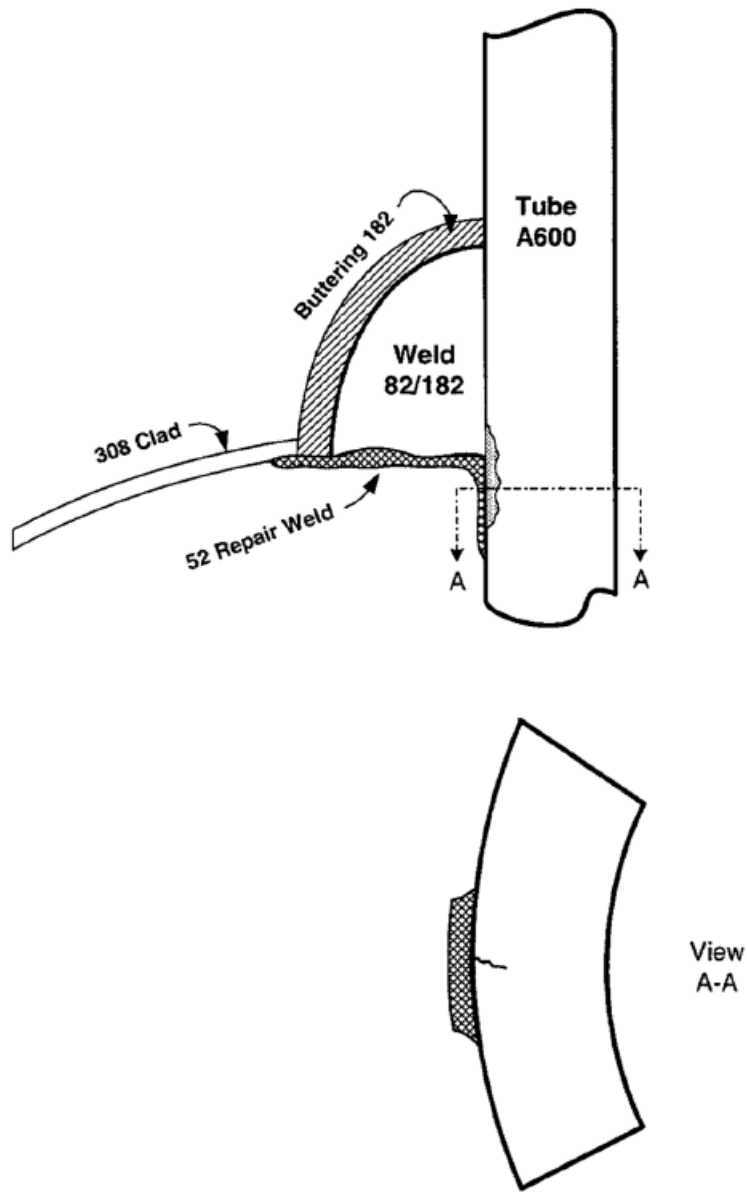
General Schematic of the Embedded Flaw Repair to a Flaw in the Head Penetration Tube Outside Surface, or to a Flaw in the Attachment Weld (J-Groove Weld)
